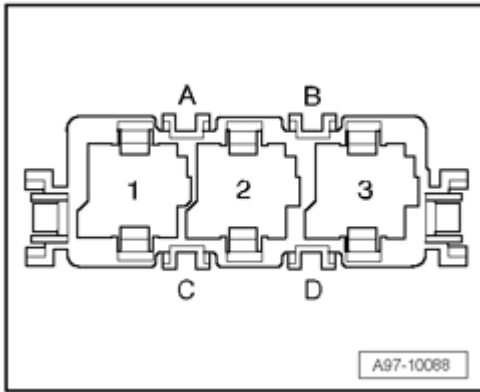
Identifying Vehicles With MPI Engine: Fuel Pump (FP) Relay J17 In Relay And Fuse Carrier, In Left E-Box Is OK
